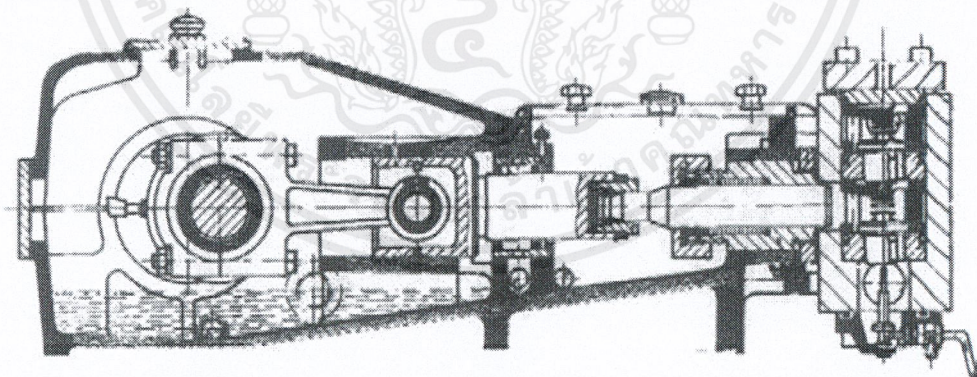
Plunger pump with monoblock liquid end and wing guided valves
